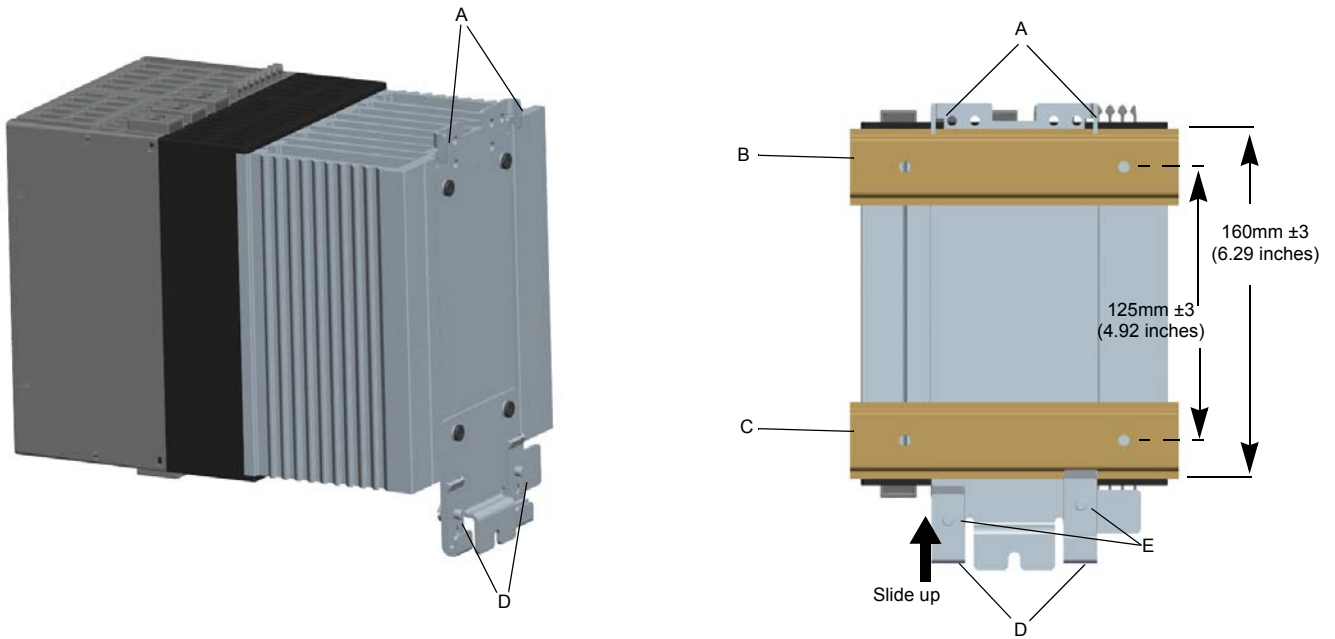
DIN rail mounting (32A unit shown; 63A units similar)
